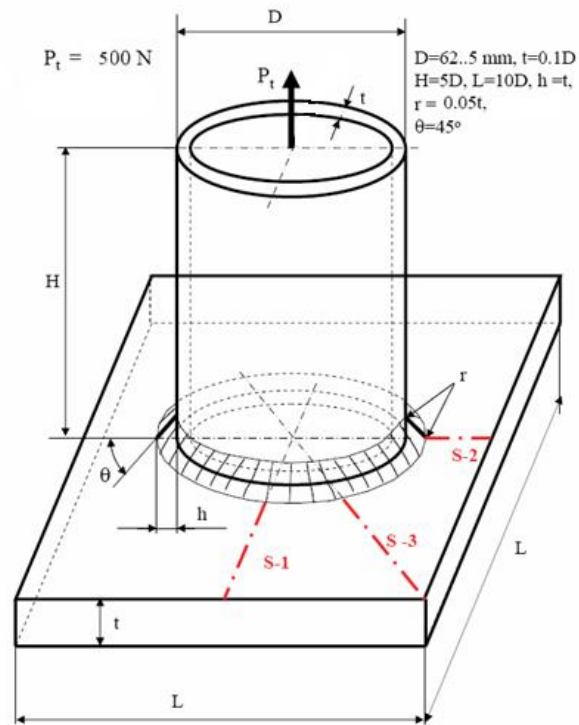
Dimensions and load acting on circular tube on plate under tension [24].
